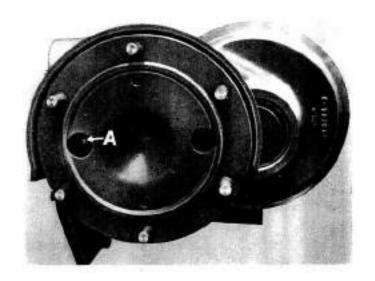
REAR HUB LUBRICATORS A. Lubricators are accessible when holes in rear wheel hub are horizontal.
